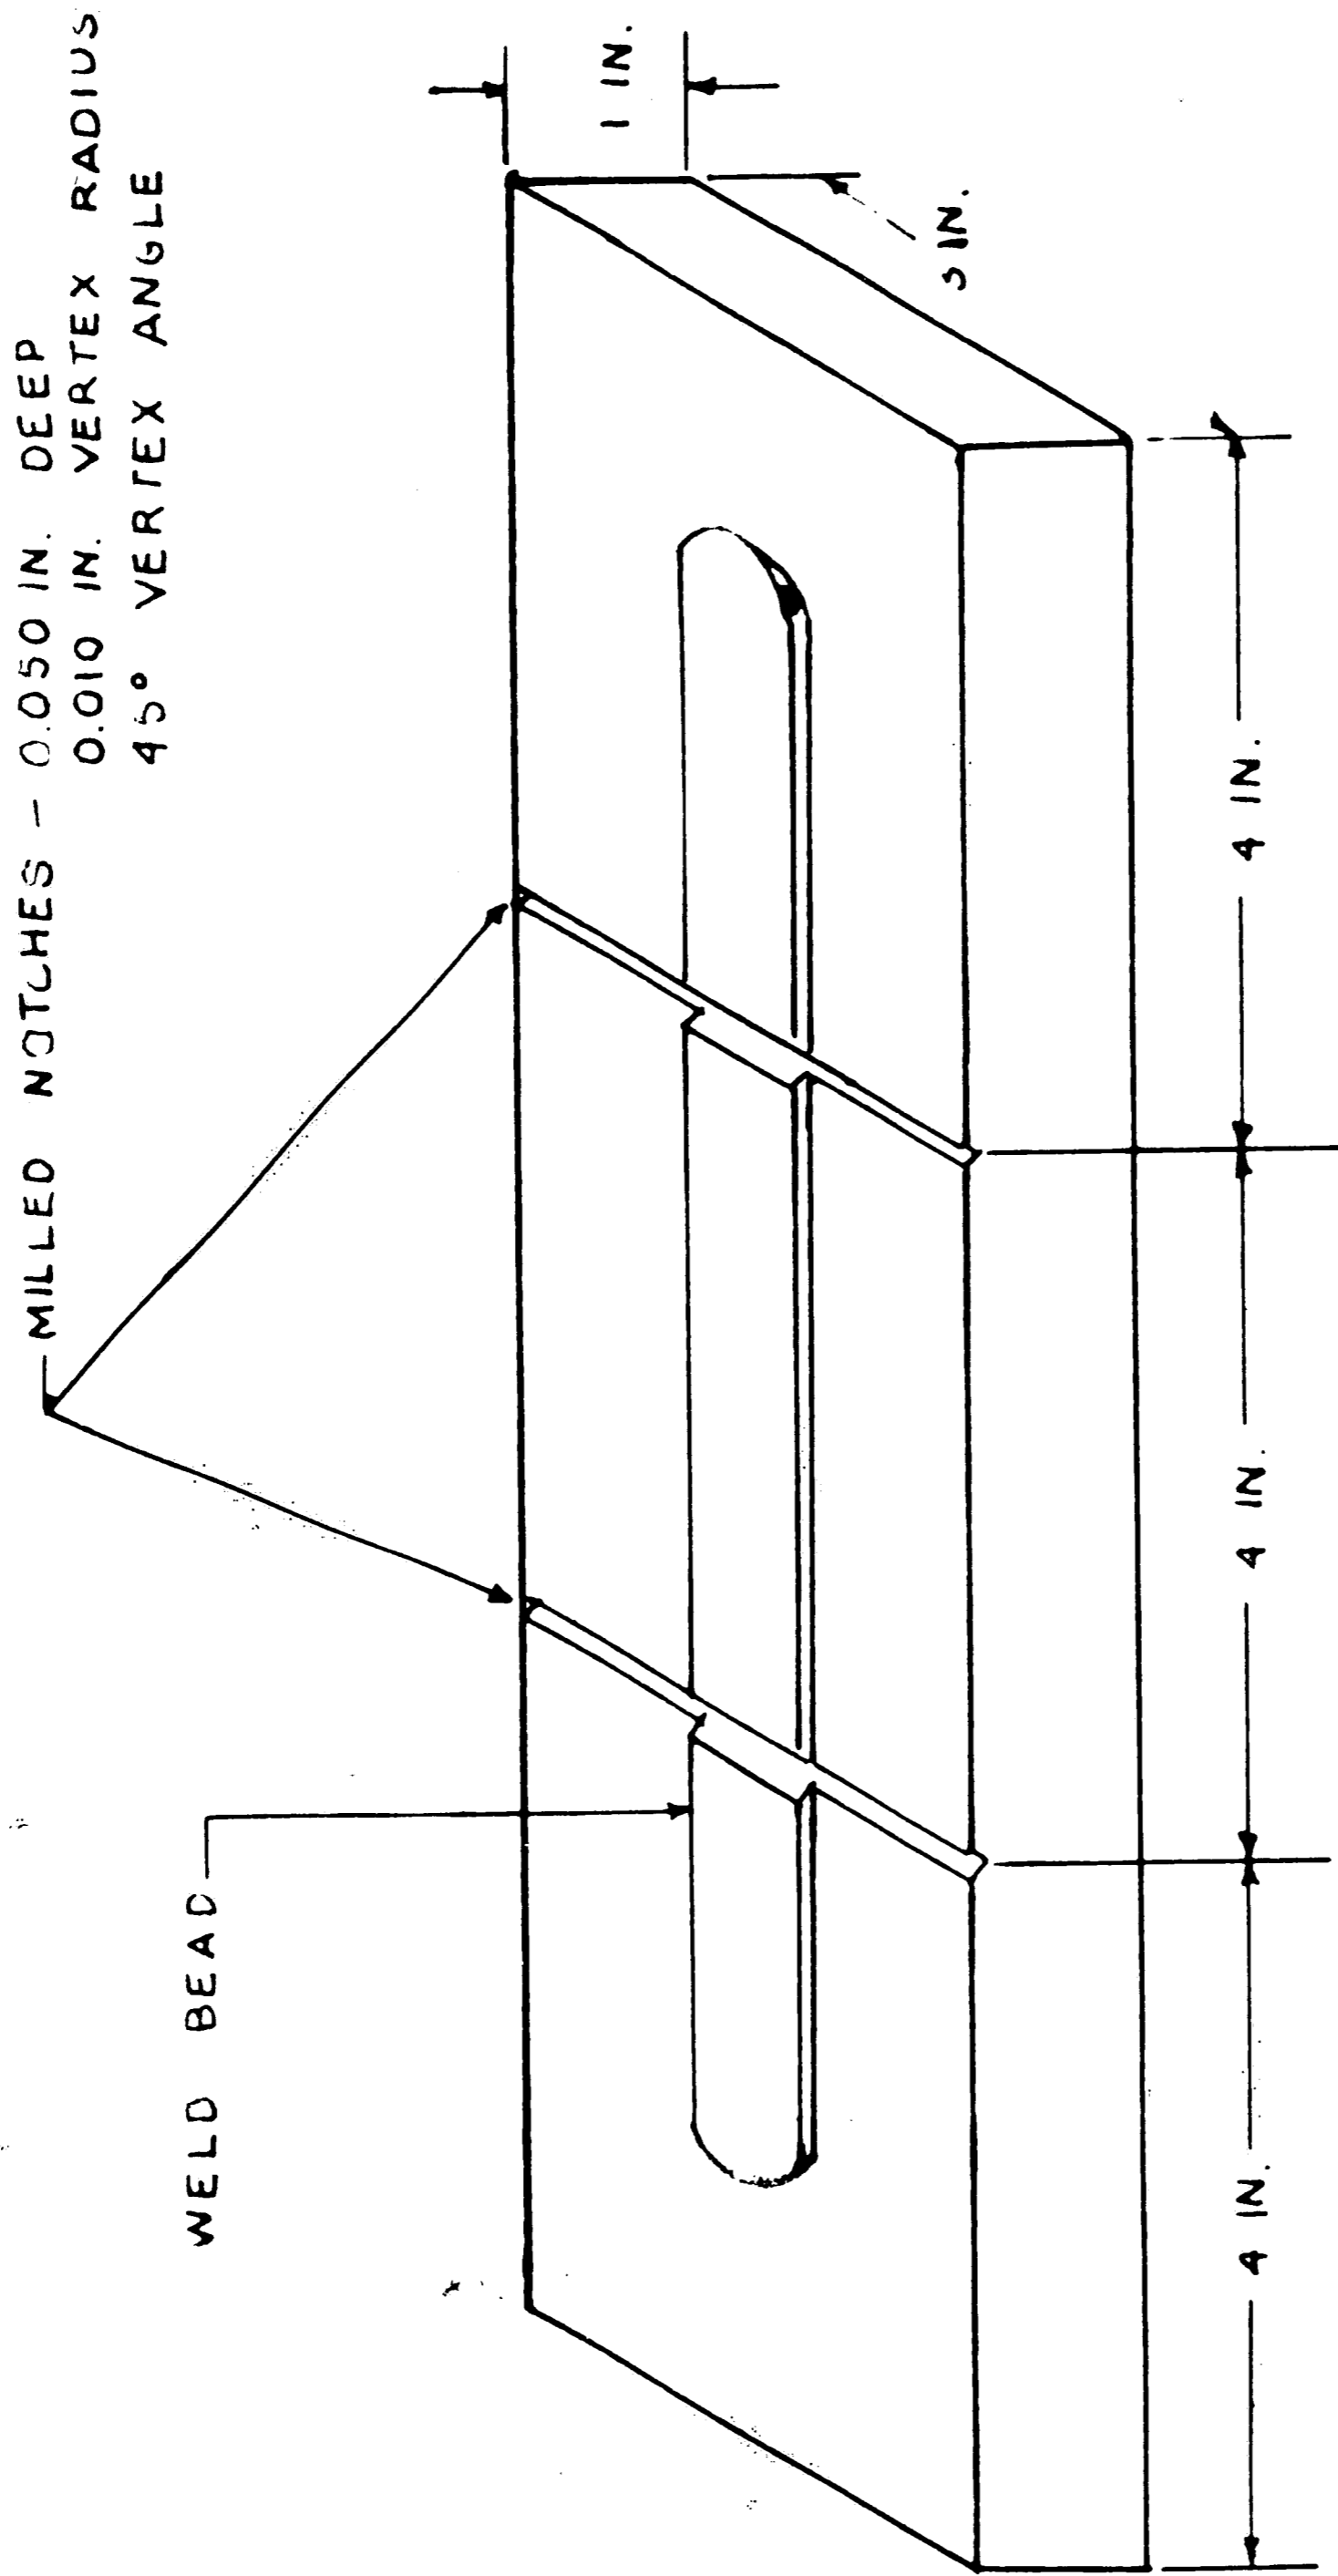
MODIFIED KINZEL NOTCH - BEND SPECIMEN.
